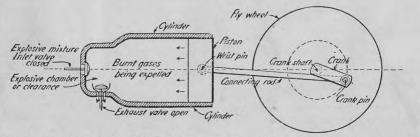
CLEARANCE STROKE, THE PISTON RETURNING TO DRIVE OUT THE BURNT
